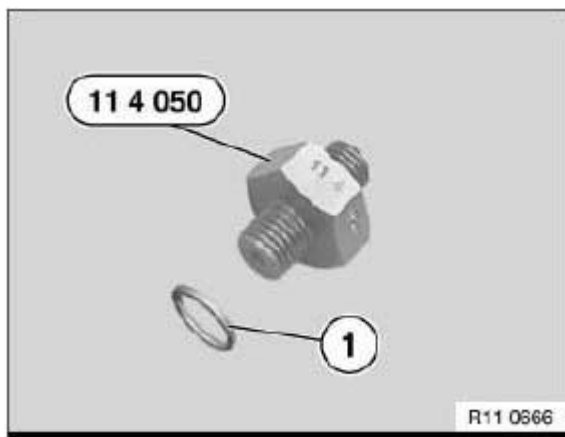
Identifying Special Tool (11 4 050) With Sealing Ring
